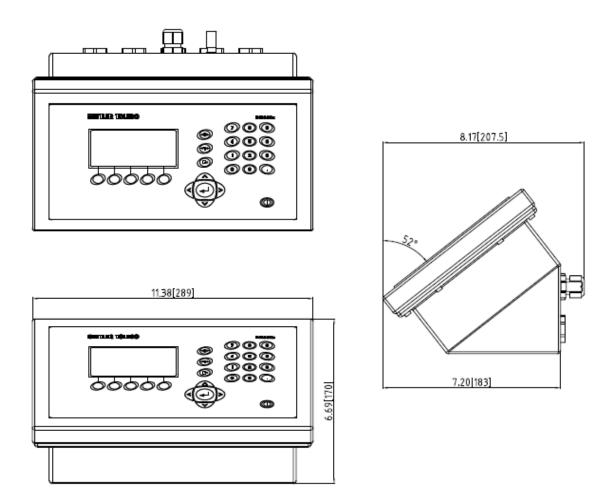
IND560x Harsh, Desk Mount Dimensions
